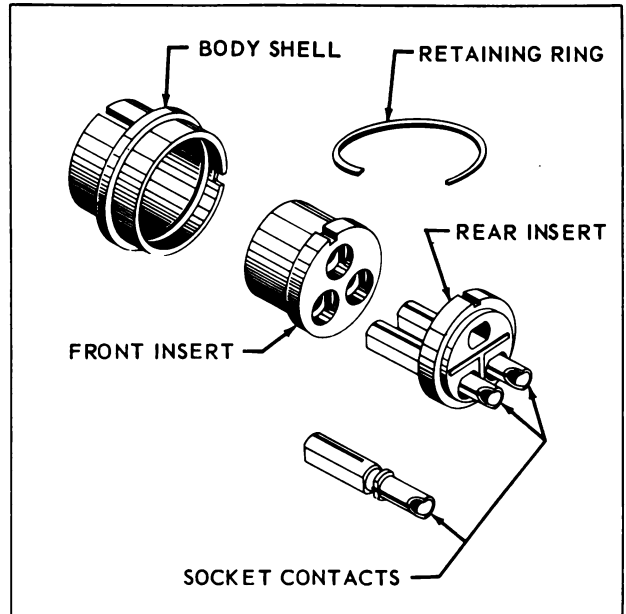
Amphenol Contact and Insert Assembly - Exploded View
